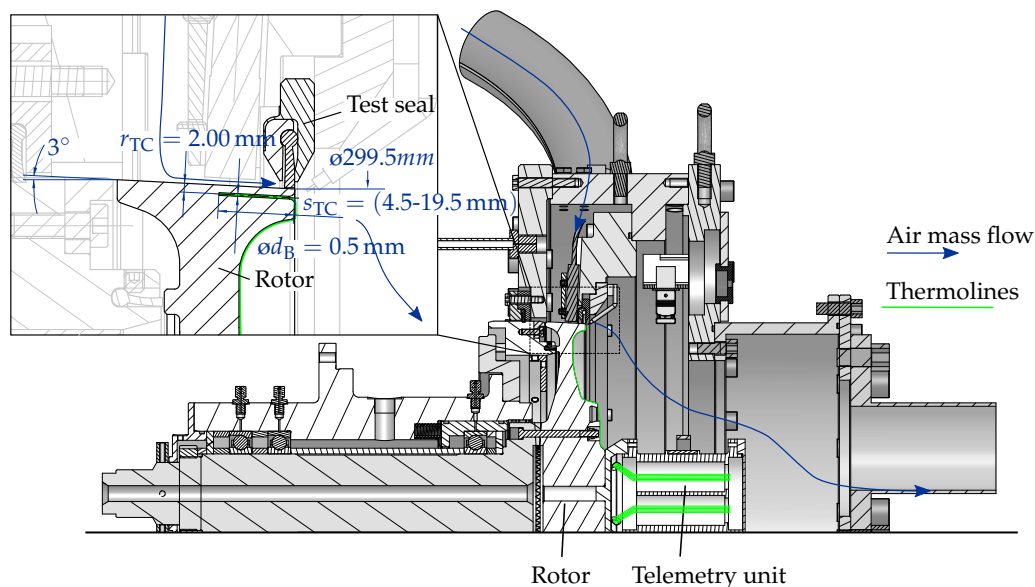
Sectional view of test rig. Detail: Bore hole geometry of rotor instrumentation.
